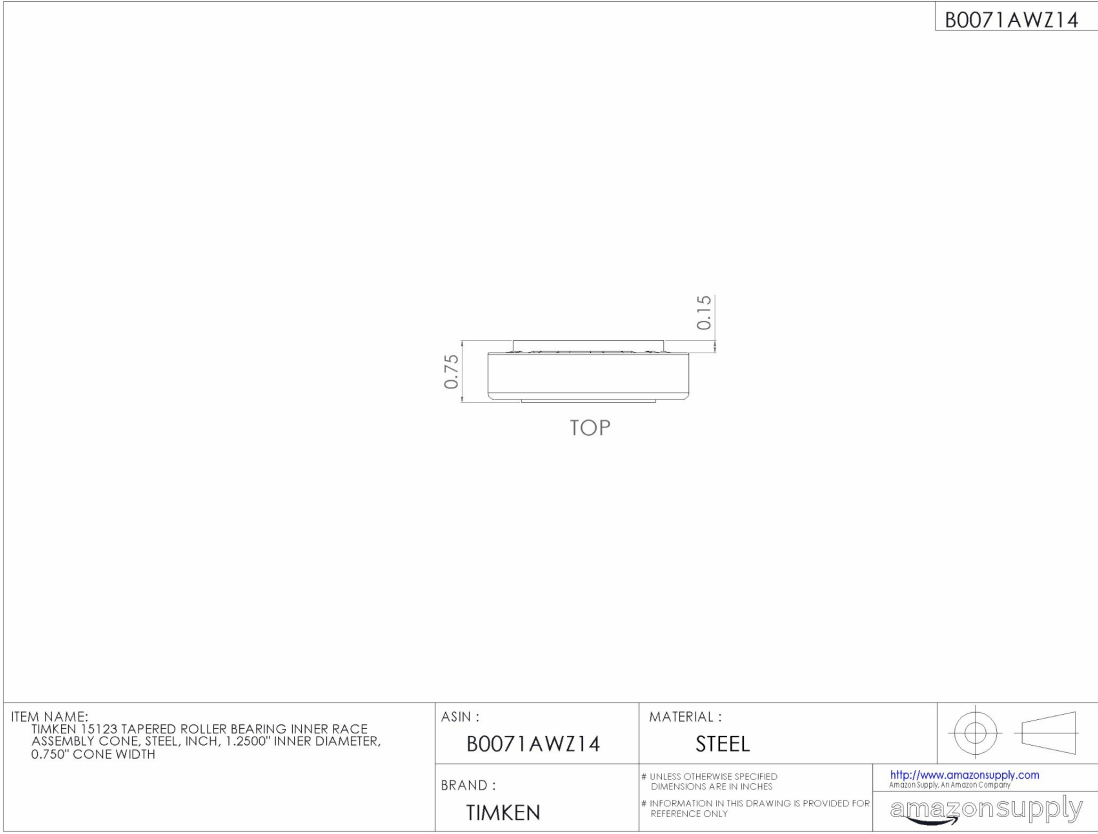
Top view technical drawing of the Timken 15123 bearing. This diagram provides a top-down perspective, showing the cone width and other critical dimensions for assembly verification.
